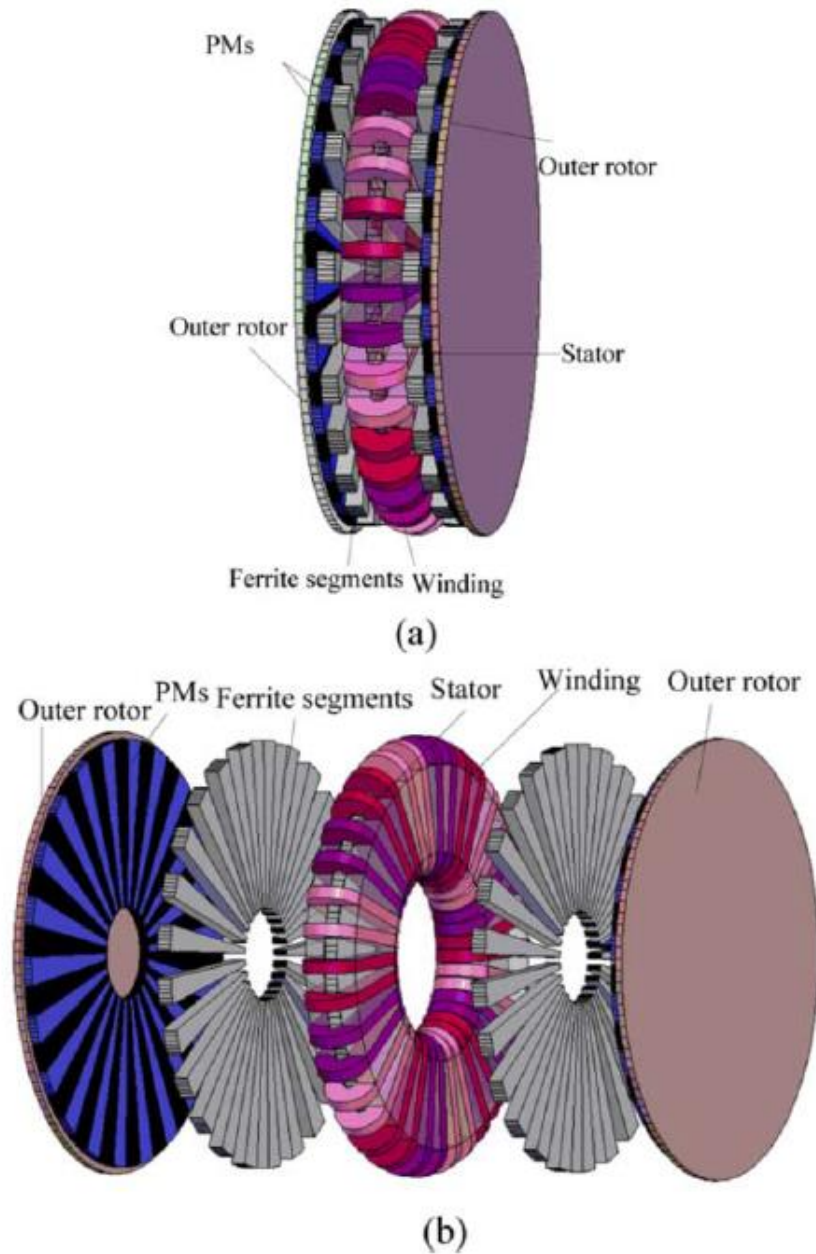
(a) Assembled View, (b) Disassembled View [84].
